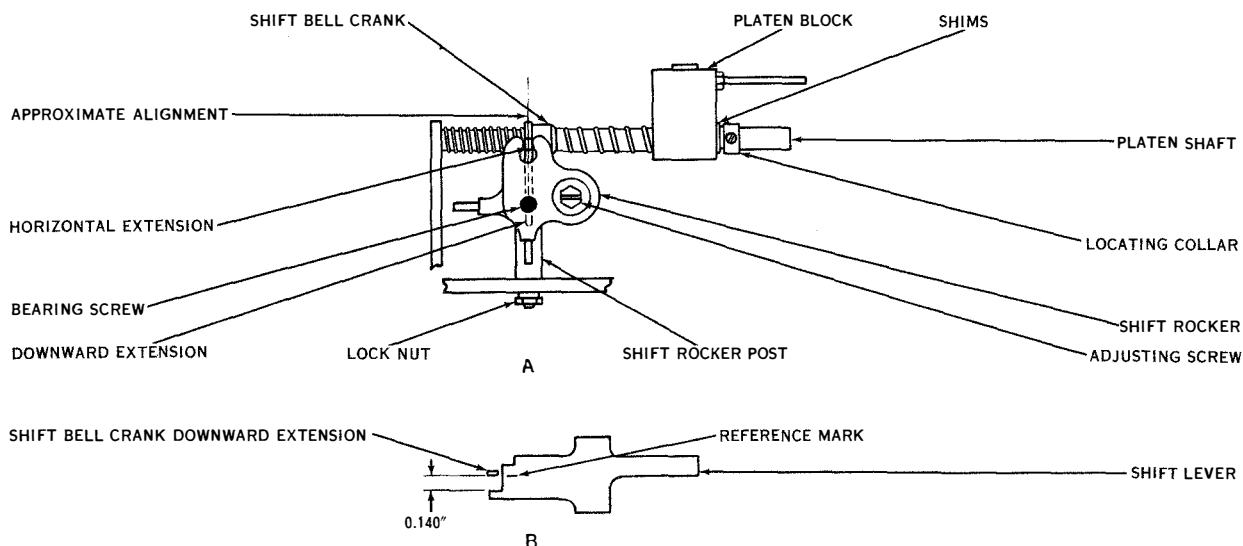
Platen Shift Rocker Post and Shift Bell Crank
